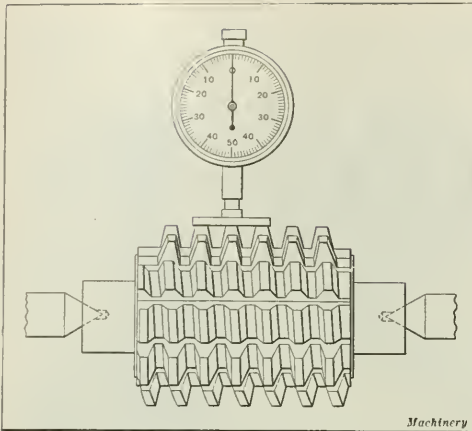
Testing Eccentricity of Hob Teeth with Indicator, after sharpening
